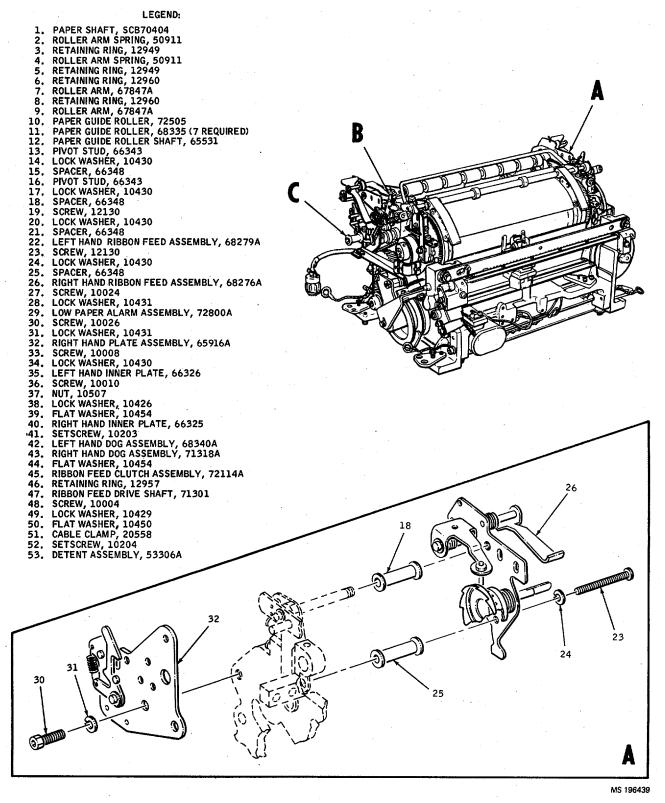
Right and Left Ribbon Feed and Low Paper Sensing Mechanisms, Exploded View (Sheet 1 of 3)
